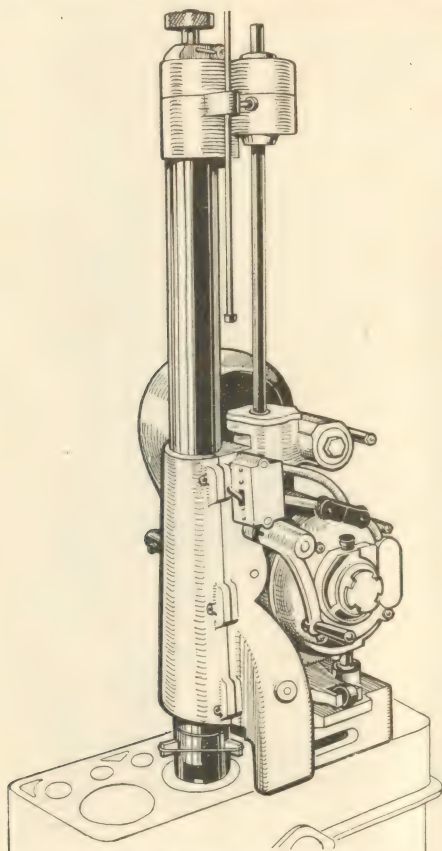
THE CENT-RO-MAC CYLINDER BORING MACHINE
